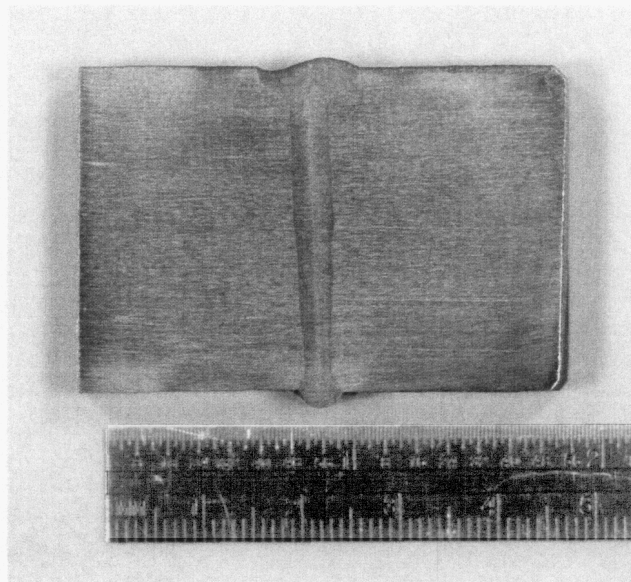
Macrograph of a RPEB welded Alloy 22 plate
